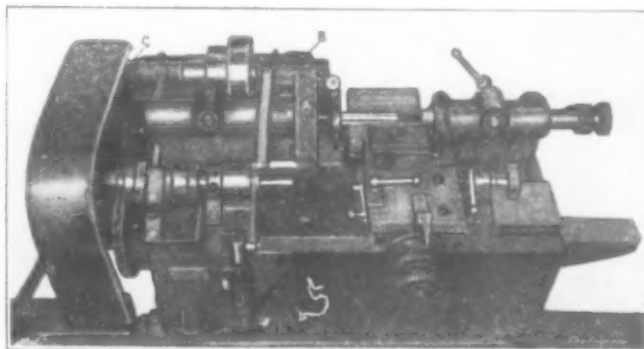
PLAN VIEW OF PRECISION SCREW-CUTTING LATHE
